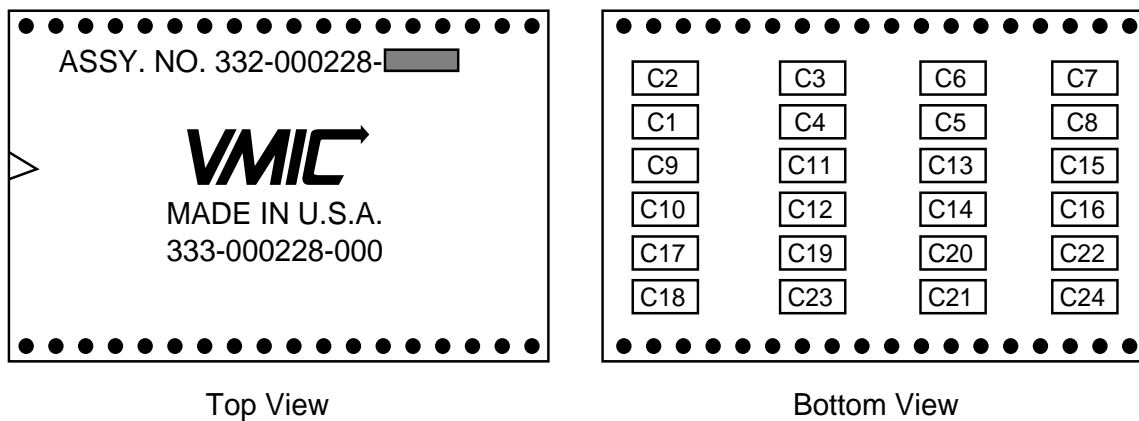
Assembly Drawing of the 0228 Filter Board
